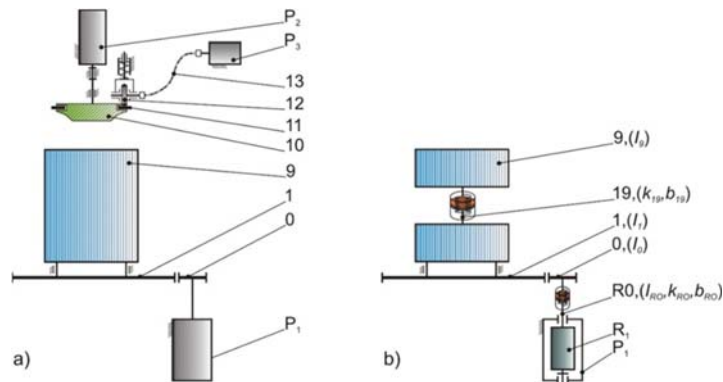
(a) Structure of the modified drive system of the cylinder, dial and roller cutter with controlled drives (b) considered mathematical model of the modified cylinder drive system.
